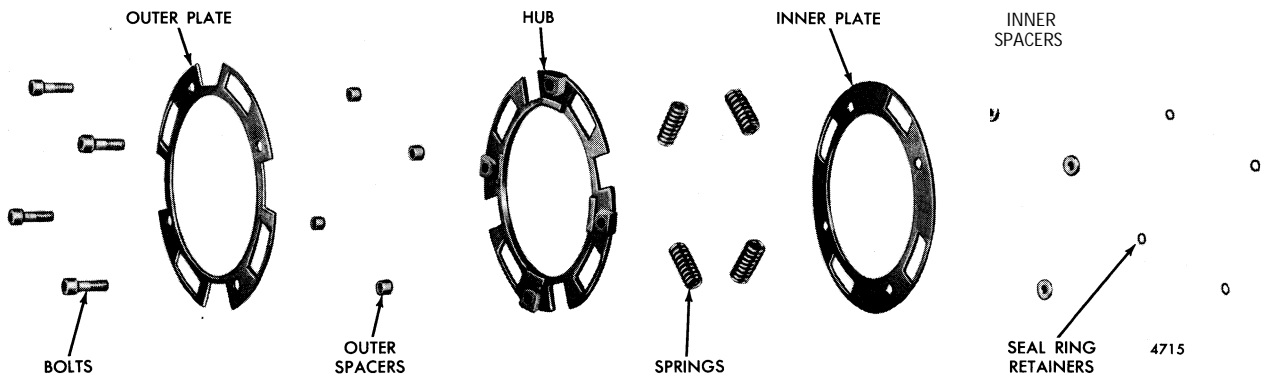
Front Timing Gear Damper Details and Relative location of Parts
